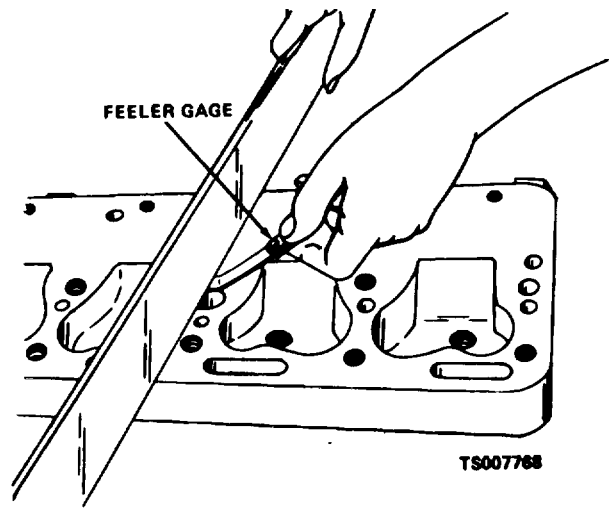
Checking Cylinder Head Flatness Crosswise.
